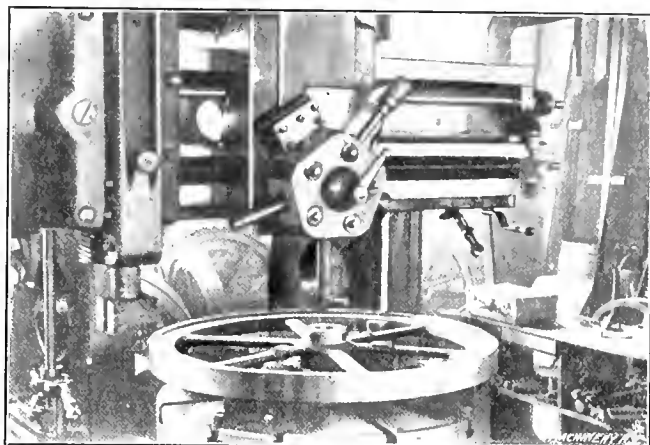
The Hub Machined on the Outside and the Center Hole Bored and Reamed
